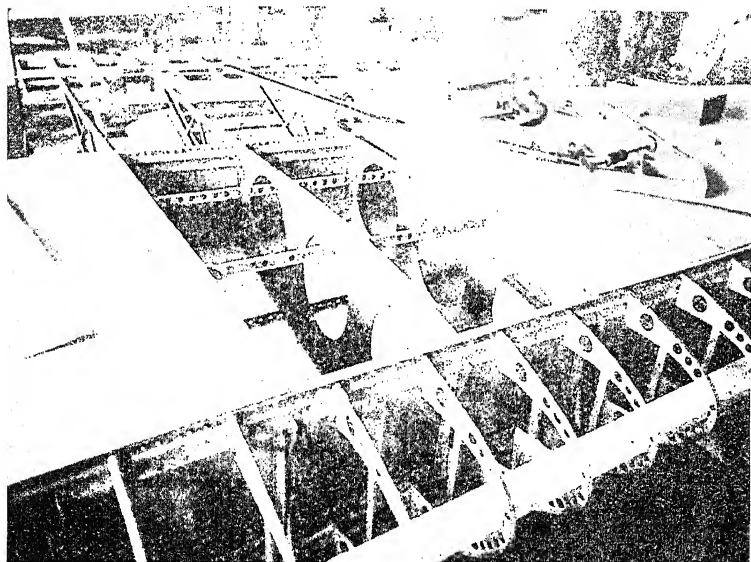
FIAT G.2—MAIN PLANE CONSTRUCTION
